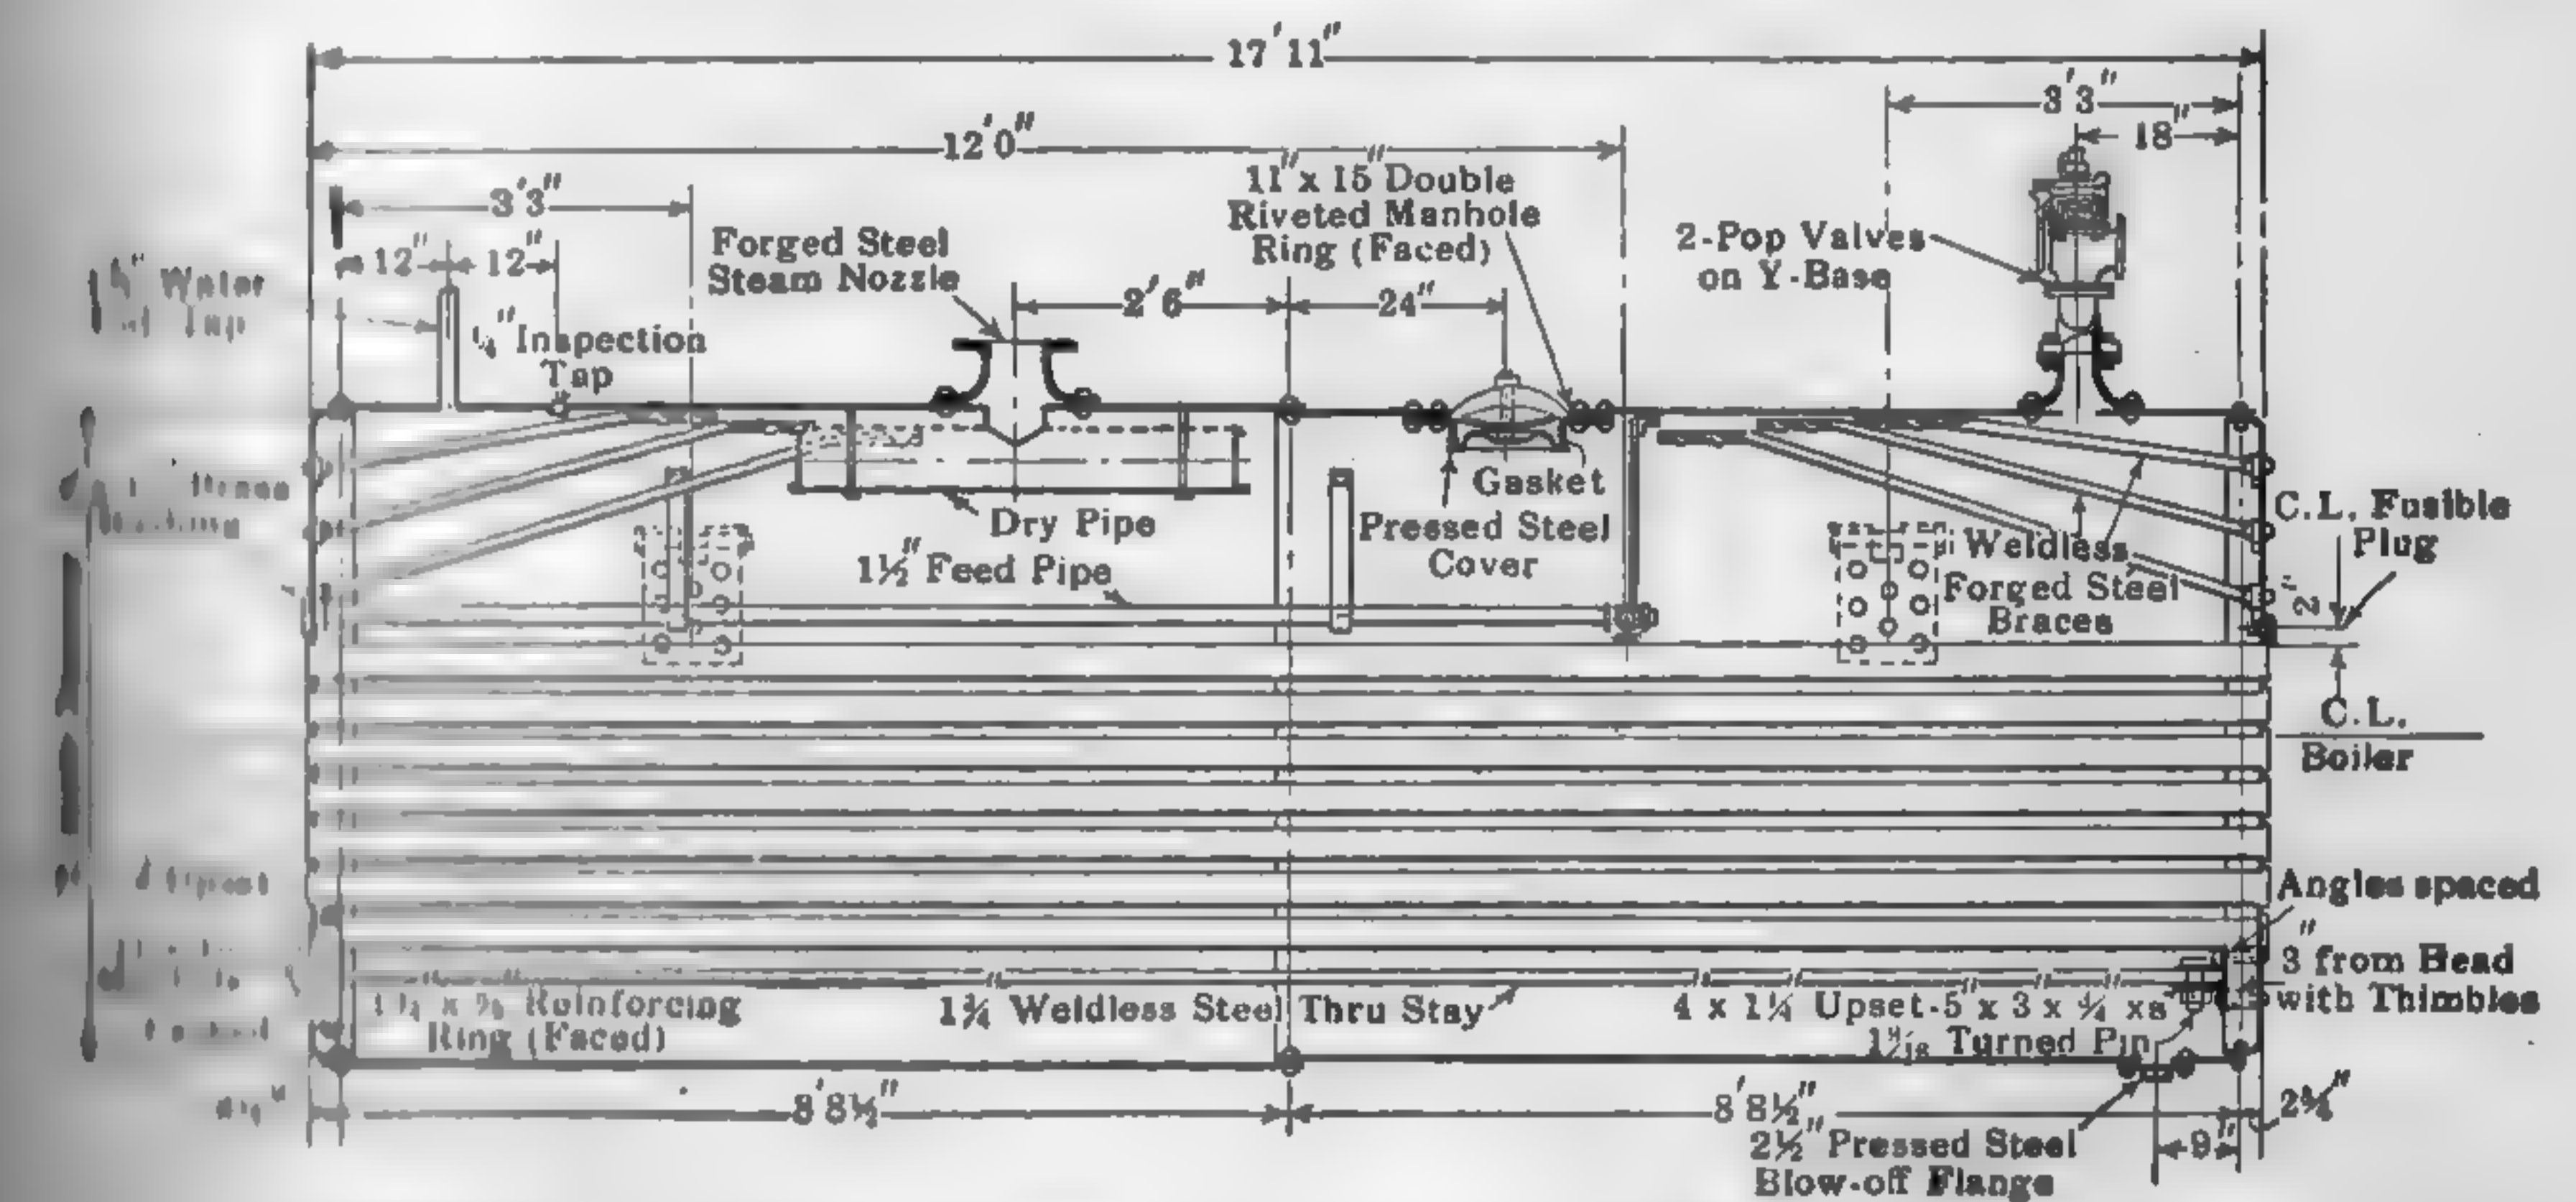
Longitudinal Section through a 150 Hp. Horizontal Return-tubular Boiler.
